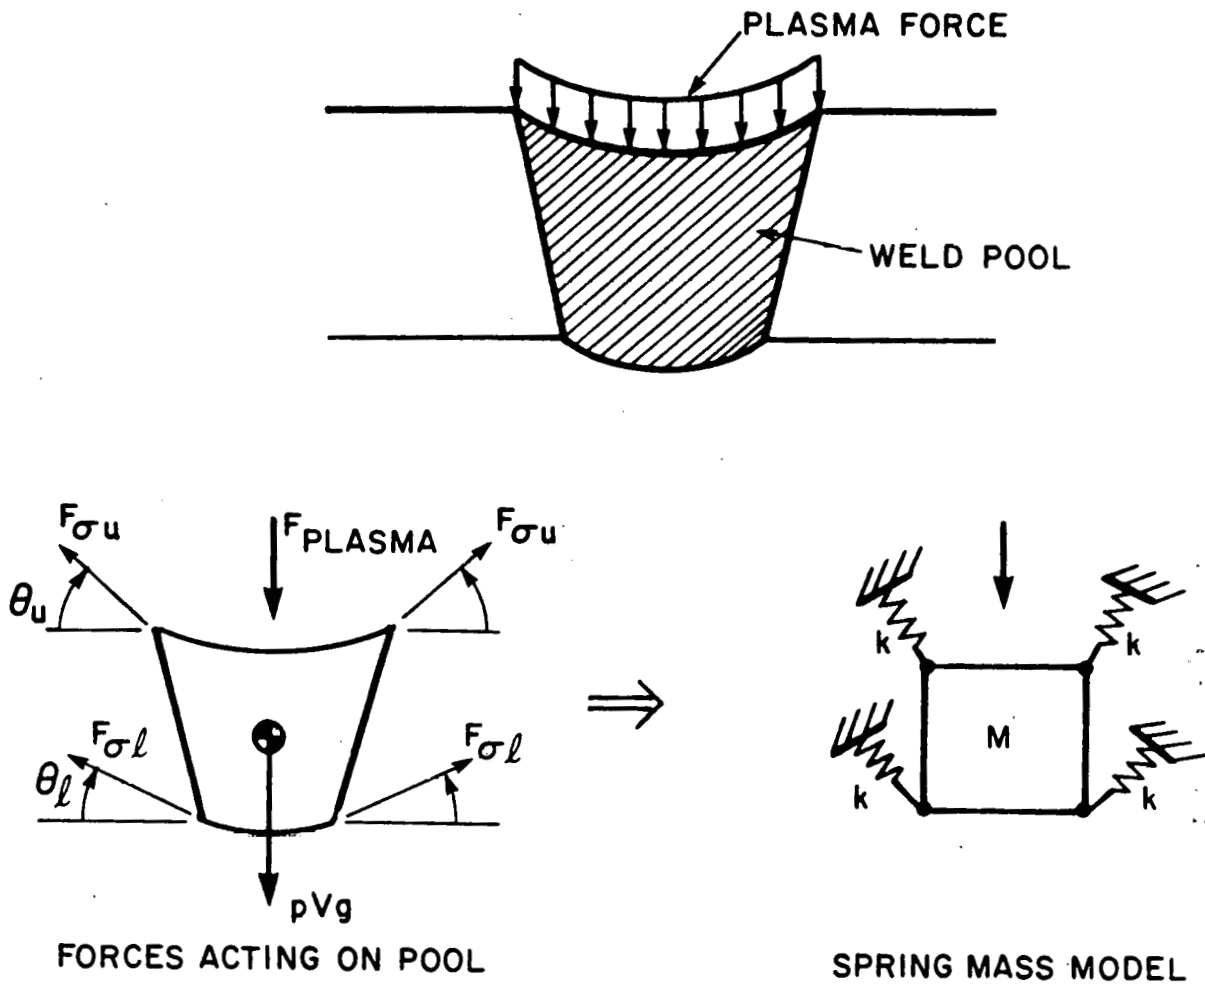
Model of a Completely Melted Weld Bead.
